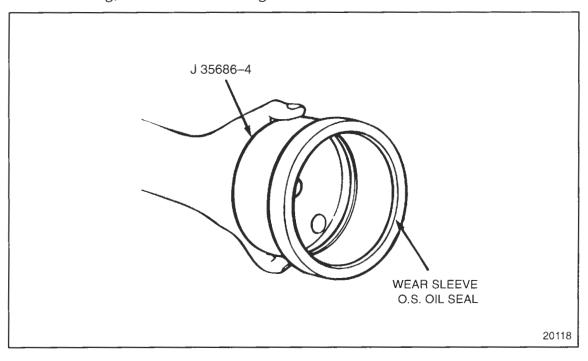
Oil Seal/Wear Installation Tool Setup
